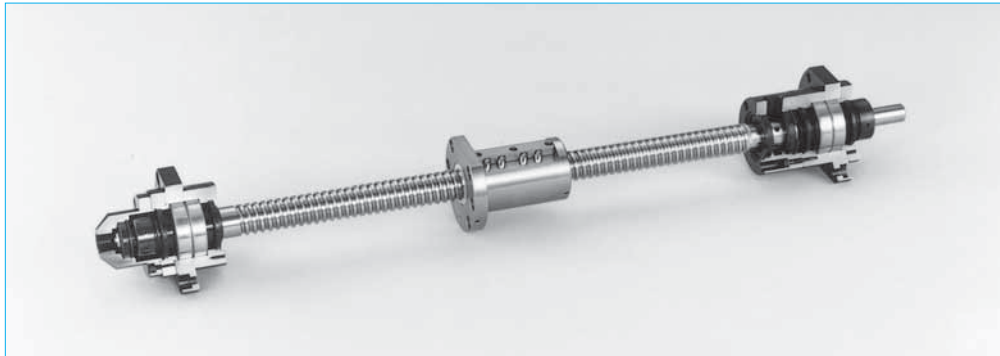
Hollow shaft ball screws for high-precision machine tools Page B512
